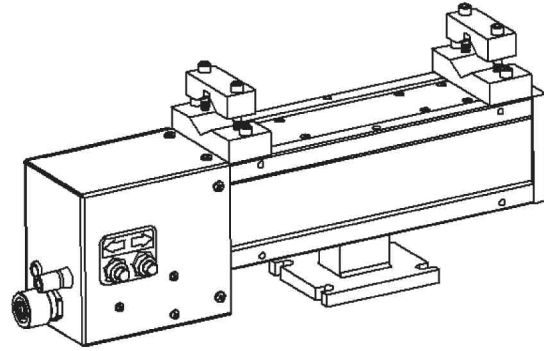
AVC-5 STANDARD DRIVE ASSEMBLY
